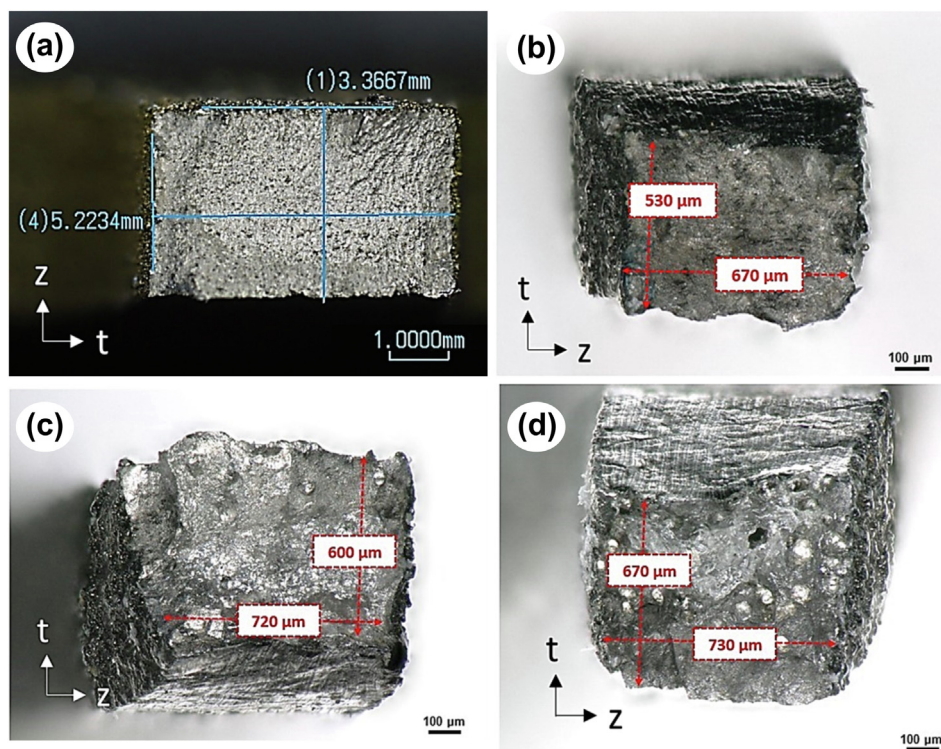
Fracture surfaces at low magnification: XY3 static tensile test piece (a), T1 ring fragment (b), T2 ring fragment (c), and T3 ring fragment (d).
